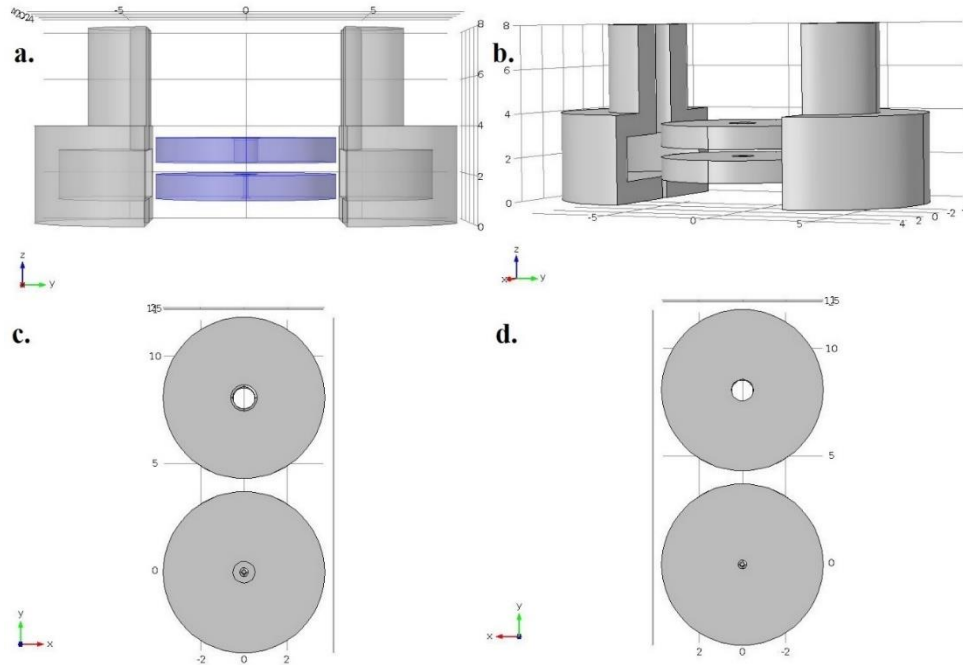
Schematic illustration of parts of piston lower end type 2, (a. front opened view, b. side opened view, c. top view of discs, d. bottom view of discs)
